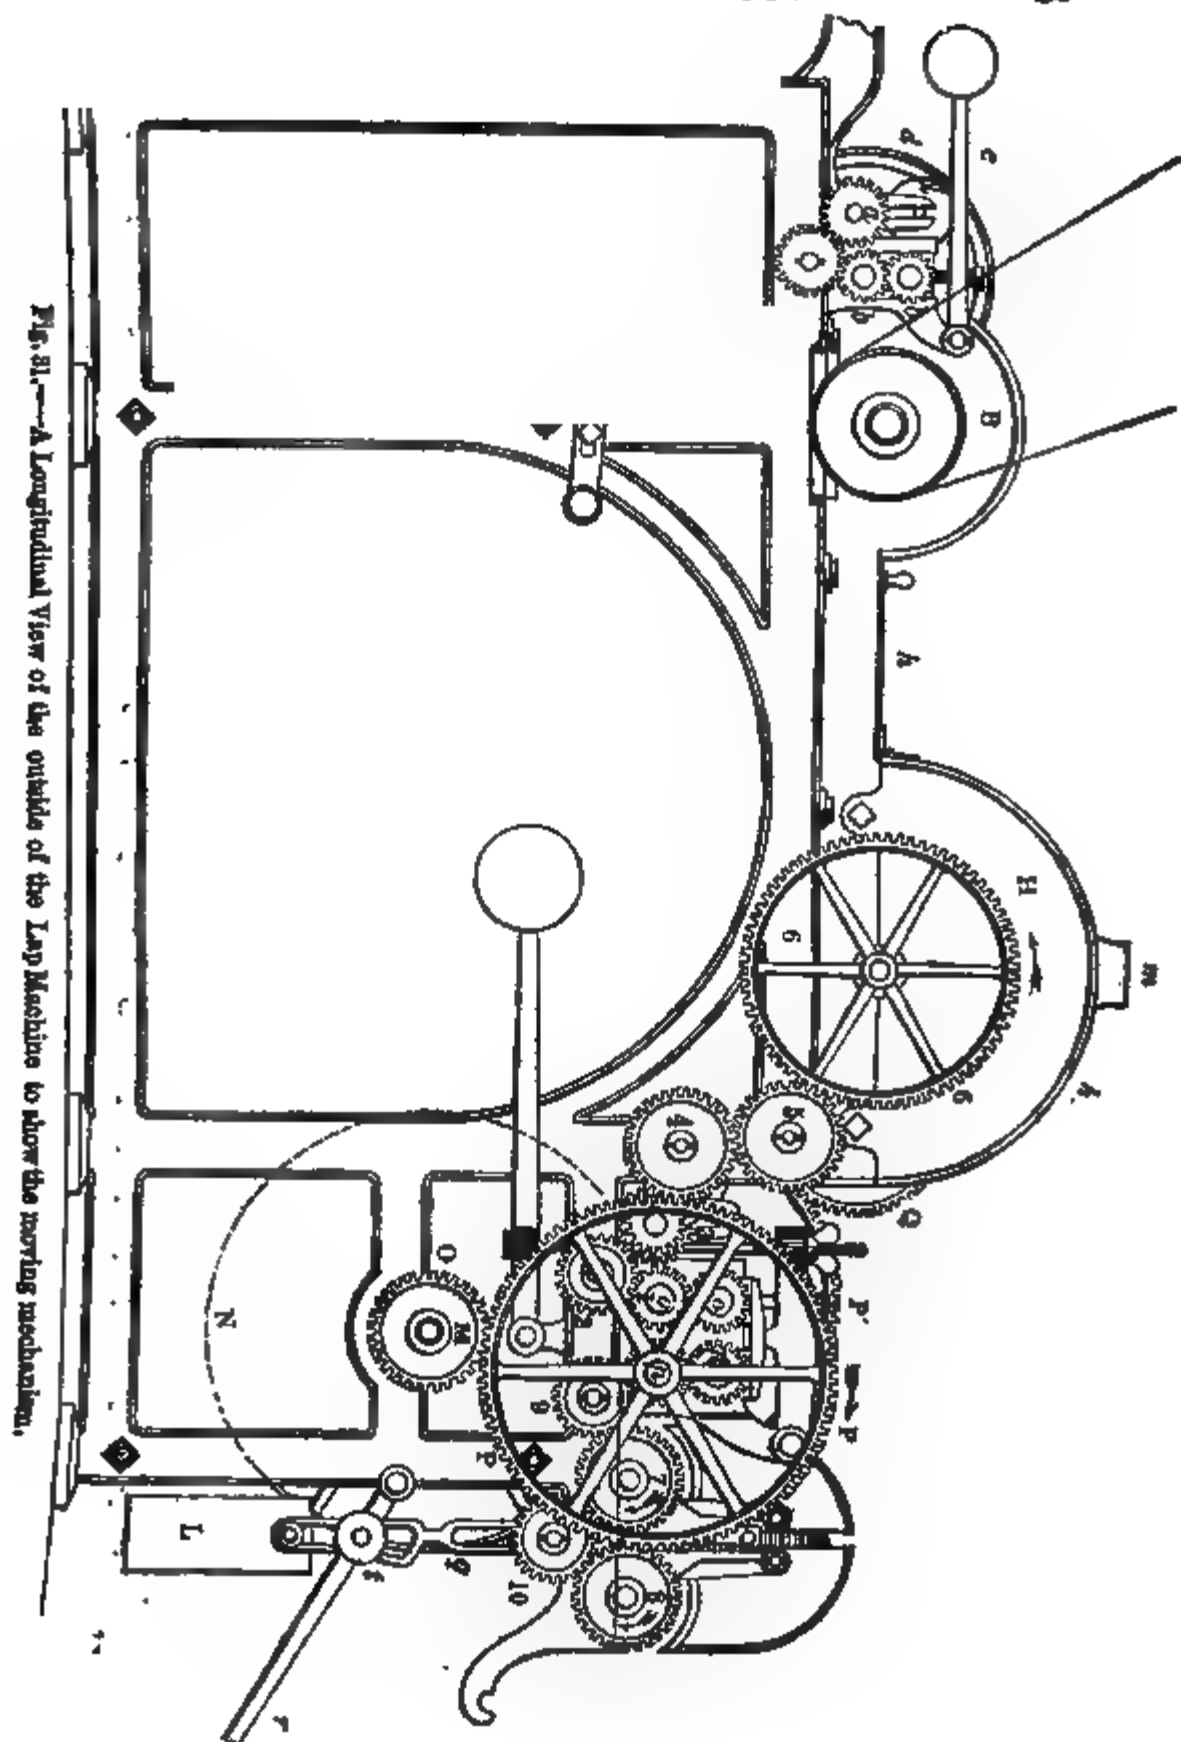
A Longitudinal View of the outside of the Lap Machine to show the moving mechanism.
